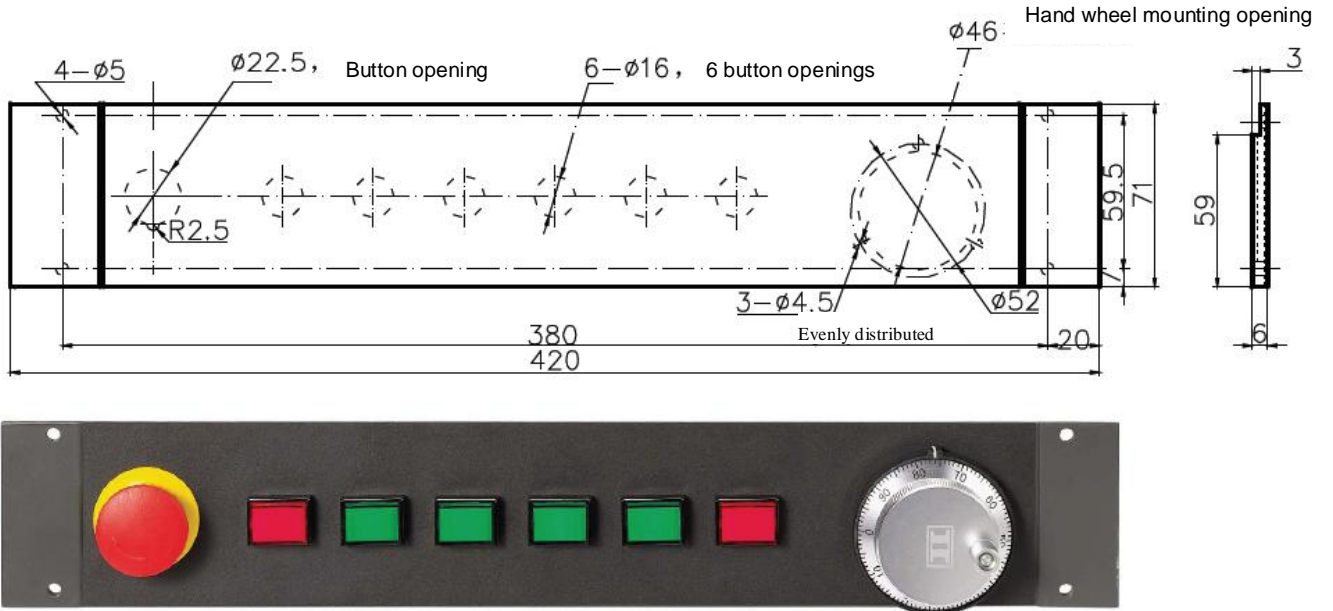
GSK 980TDHi additional panel AP01 installation dimensions
